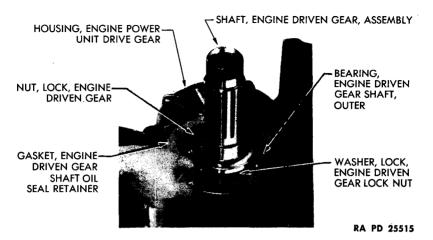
Installing Engine Driven Gear Shaft Oil Seal Retainer Gasket
